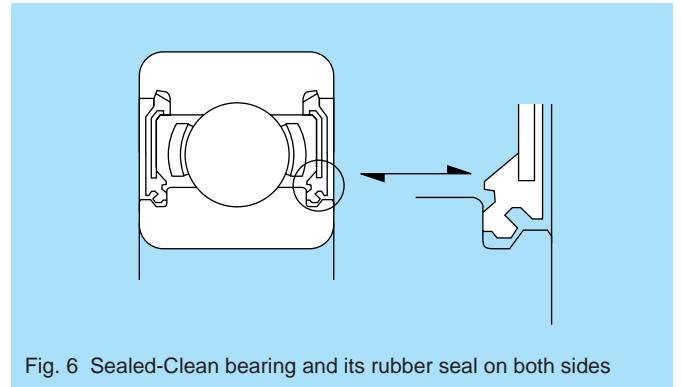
Sealed-Clean bearing and its rubber seal on both sides
